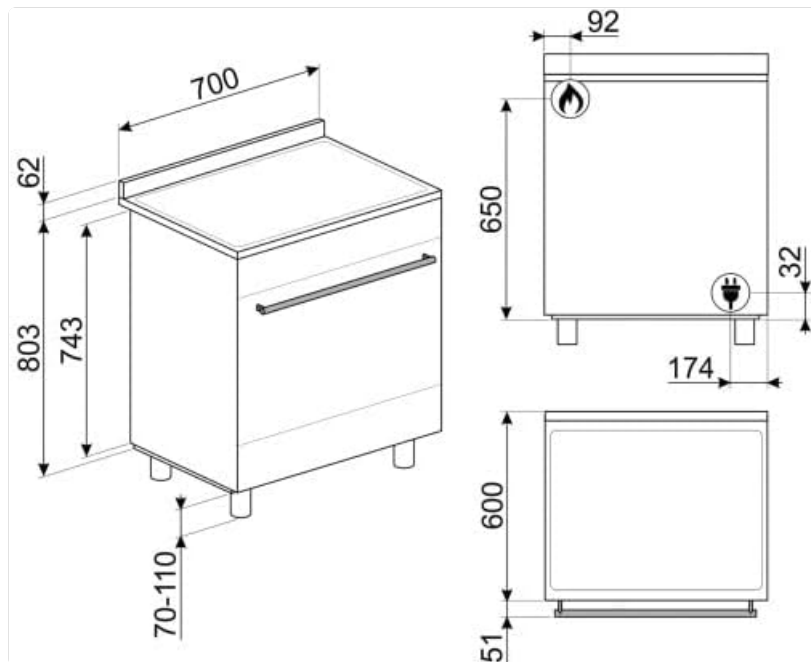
Technical drawing illustrating the dimensions of the Smeg B71GMX2. Dimensions are approximately 700mm (width) x 600mm (depth) x 900mm (height).
